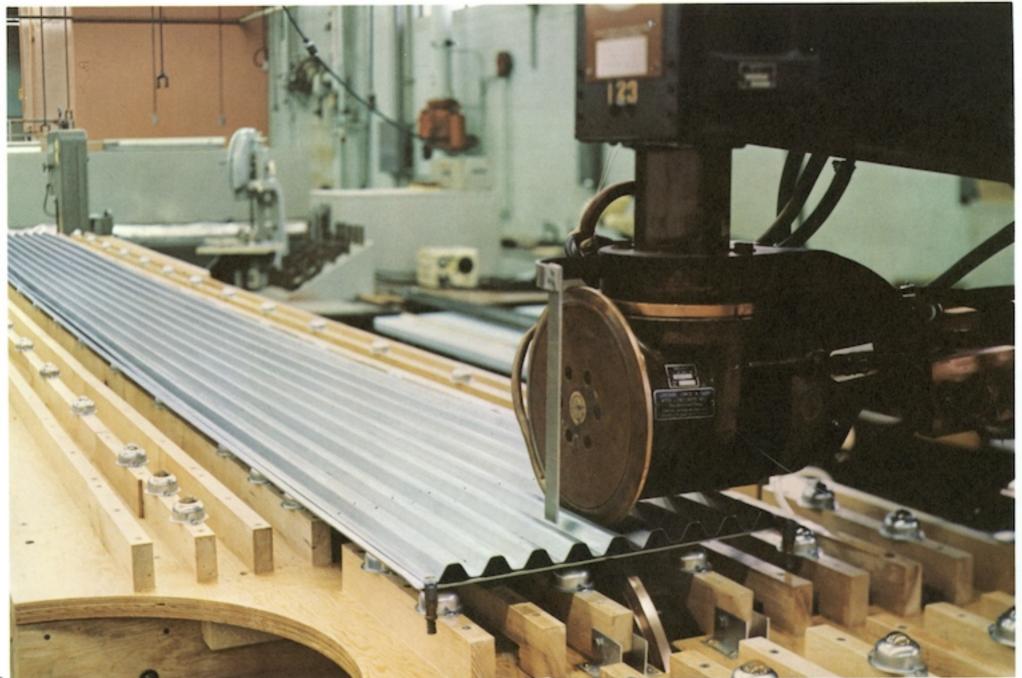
H. Continuous Roller Spotwelding of 20-Foot Truss Core Bottom Face Sheet
